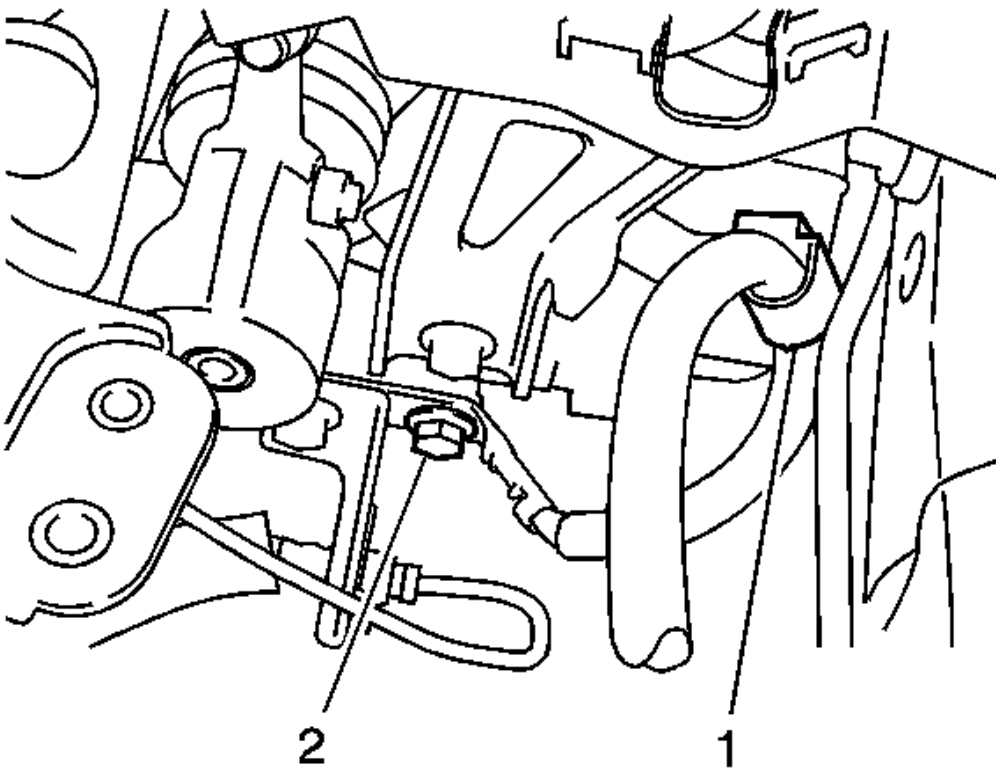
View Of Bolt & Clamp (Manual Transaxle)
